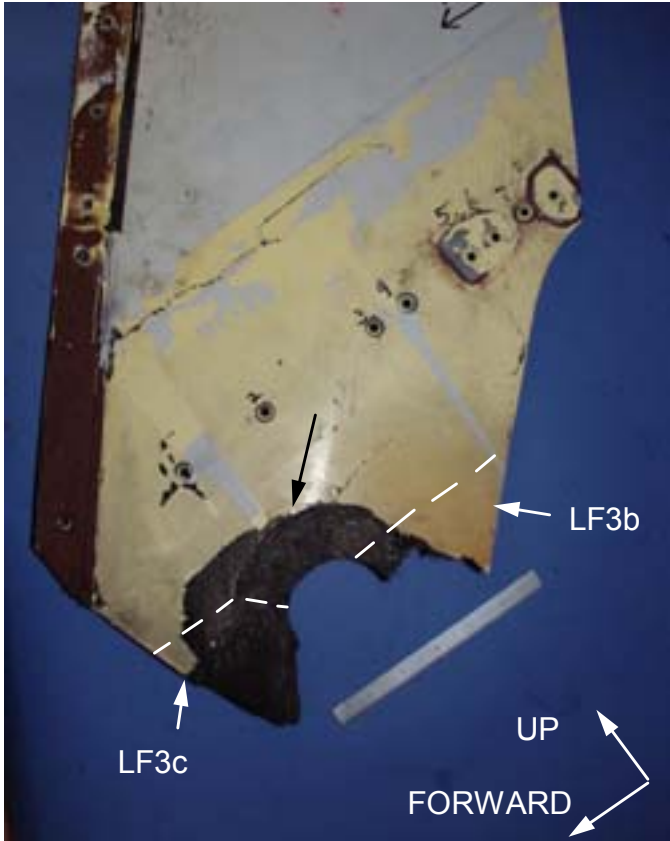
Translamellar fracture surface on the inboard piece of specimen LC2.
